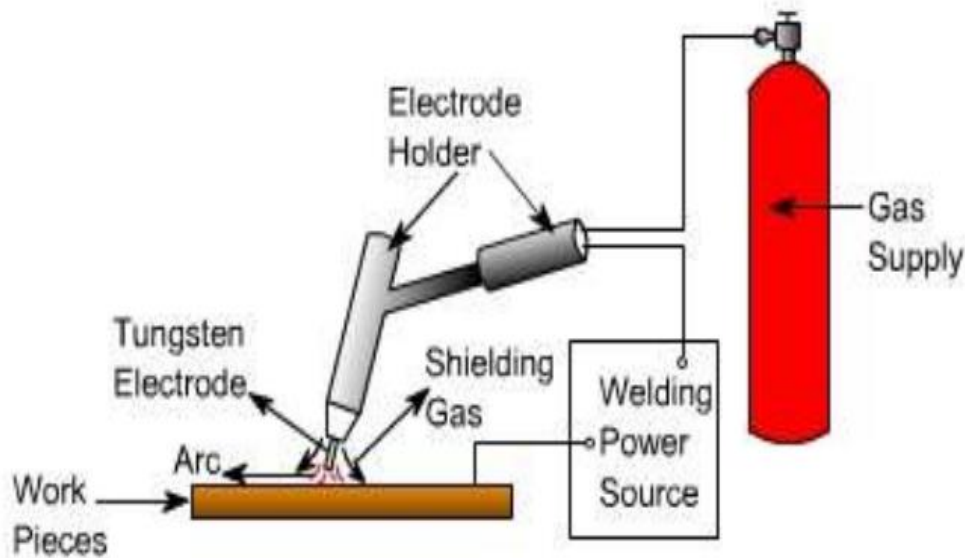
Schematic diagram of TIG welding. (nptel.ac.in)
